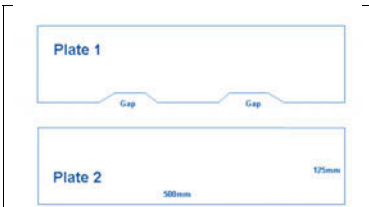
Schematic drawing of areas of machining to introduce a gap between the plates to be welded.
